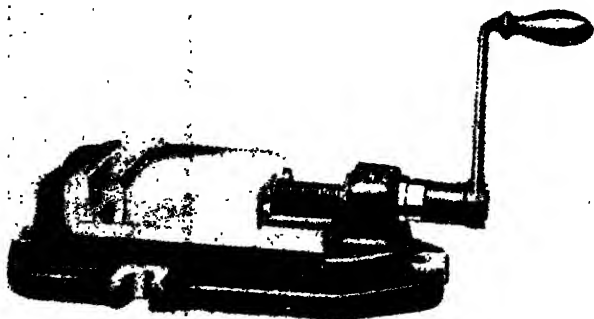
The flanged vise. (*The Brown & Sharpe Manufacturing Company*)
